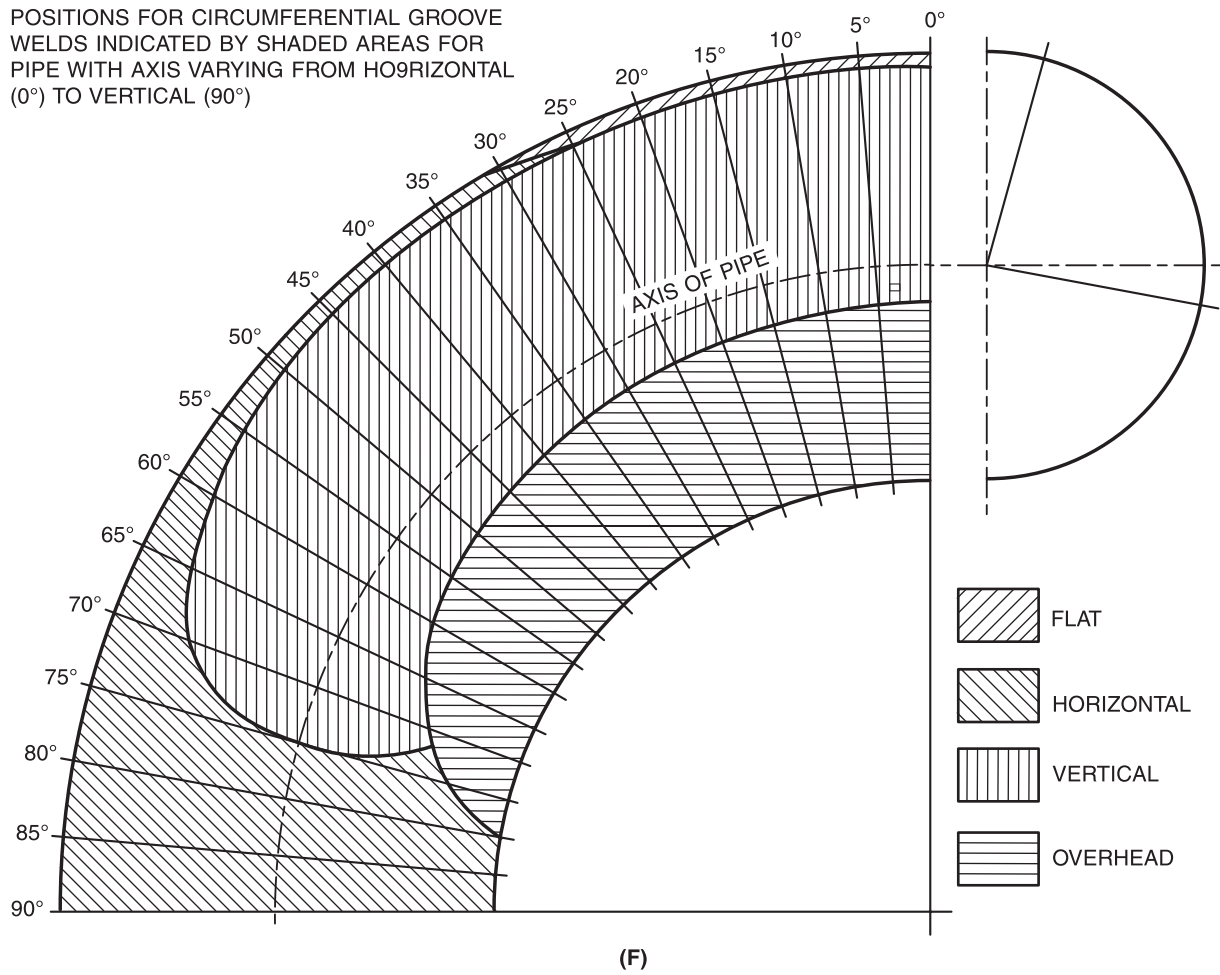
C—Welding Position Diagram for Groove Welds in Pipe
